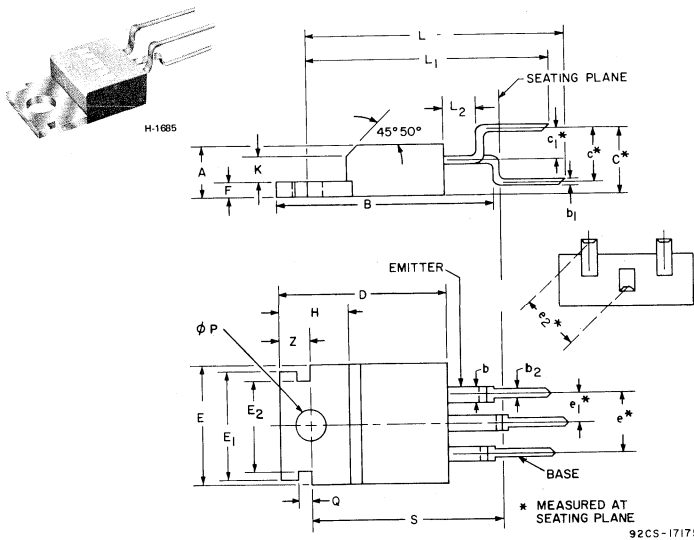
Dimensional outline of VERSAWATT transistor package designed for mounting on printed-circuit boards.
